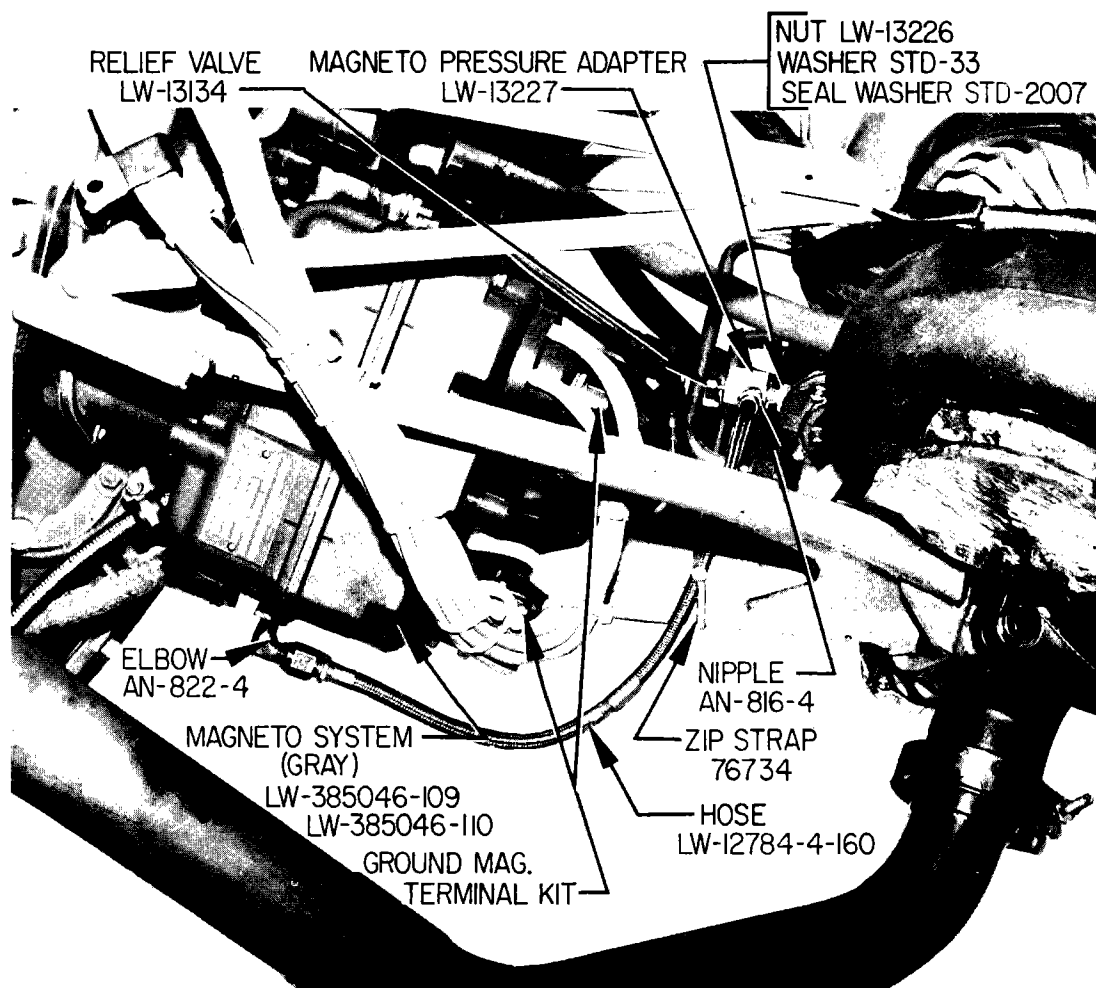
Top View of Engine Showing Details for Pressurized Magneto Installation
